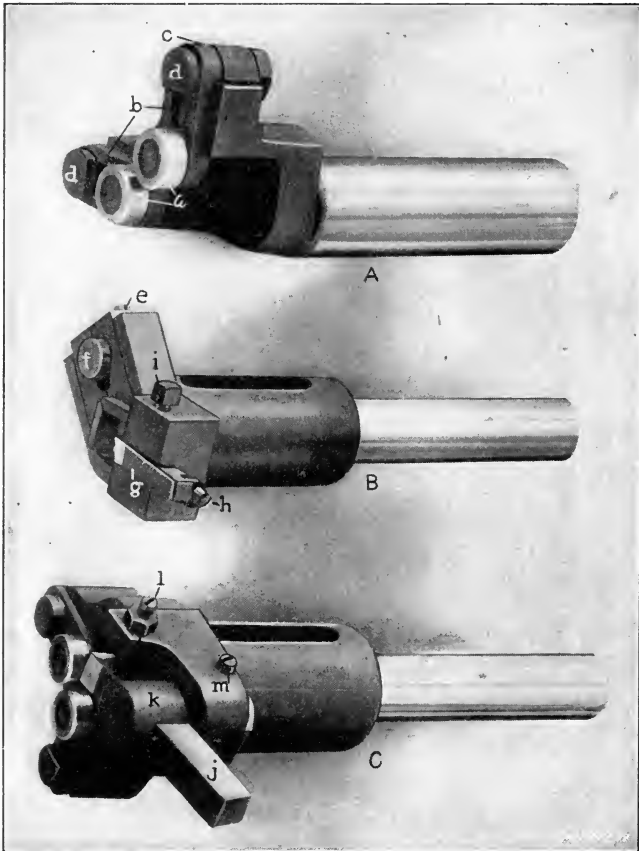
Roller Steadyrest—Shaving and Roughing Box-tools
